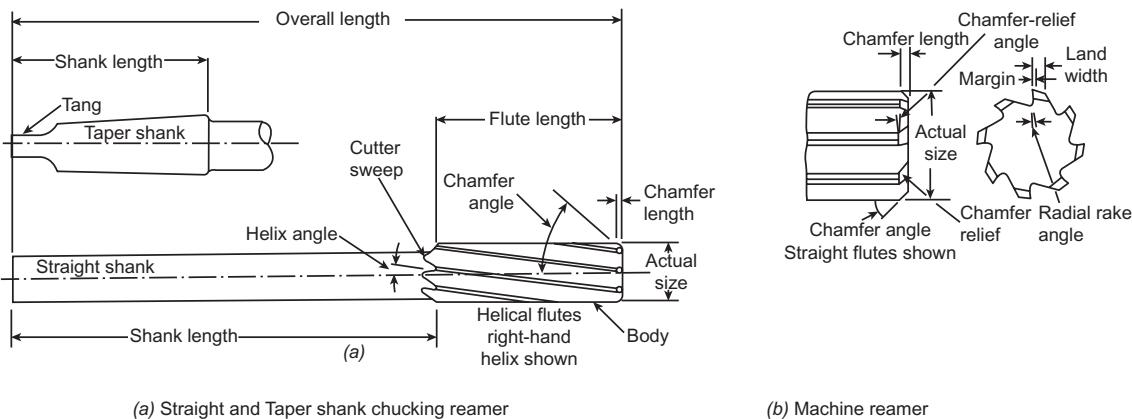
Elements of metal-cutting reamers. Courtesy: MCTI, *Metal Cutting Tool Handbook*.
